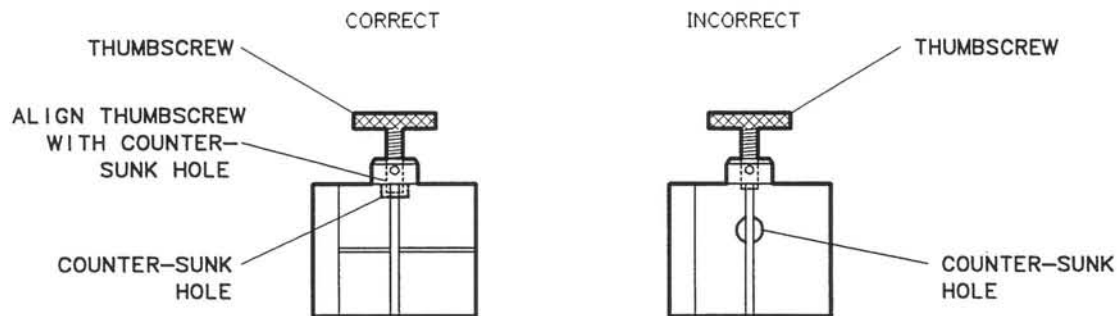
Aligning the Thumbscrew With the Counter-Sunk Hole
